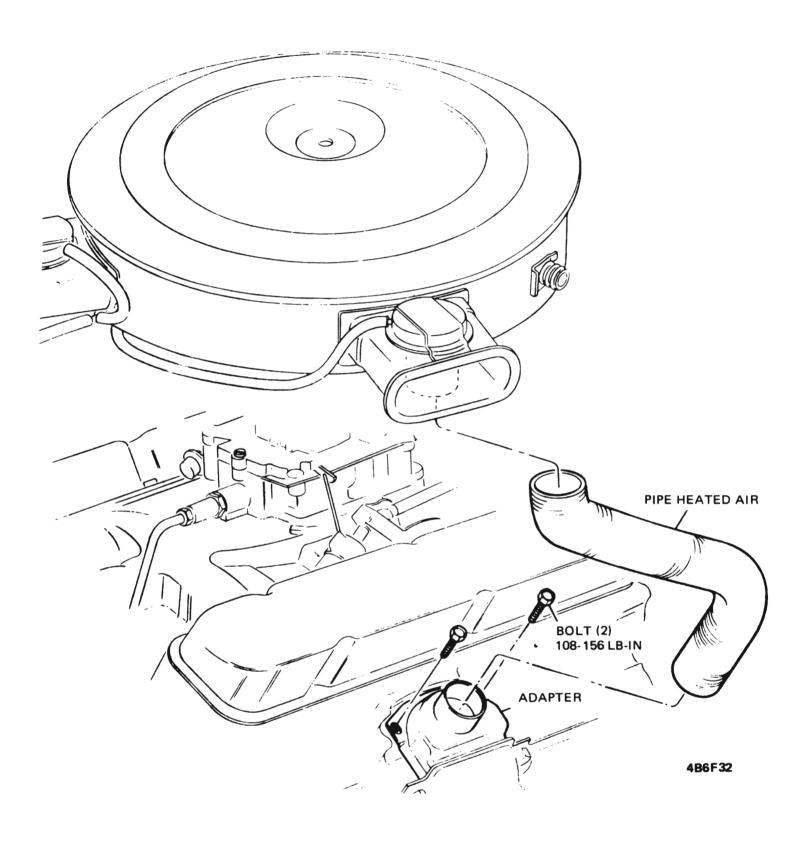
F-32 "A" Series Air Cleaner Mounting (455 Stage I Engine) with Dual Snorkel
